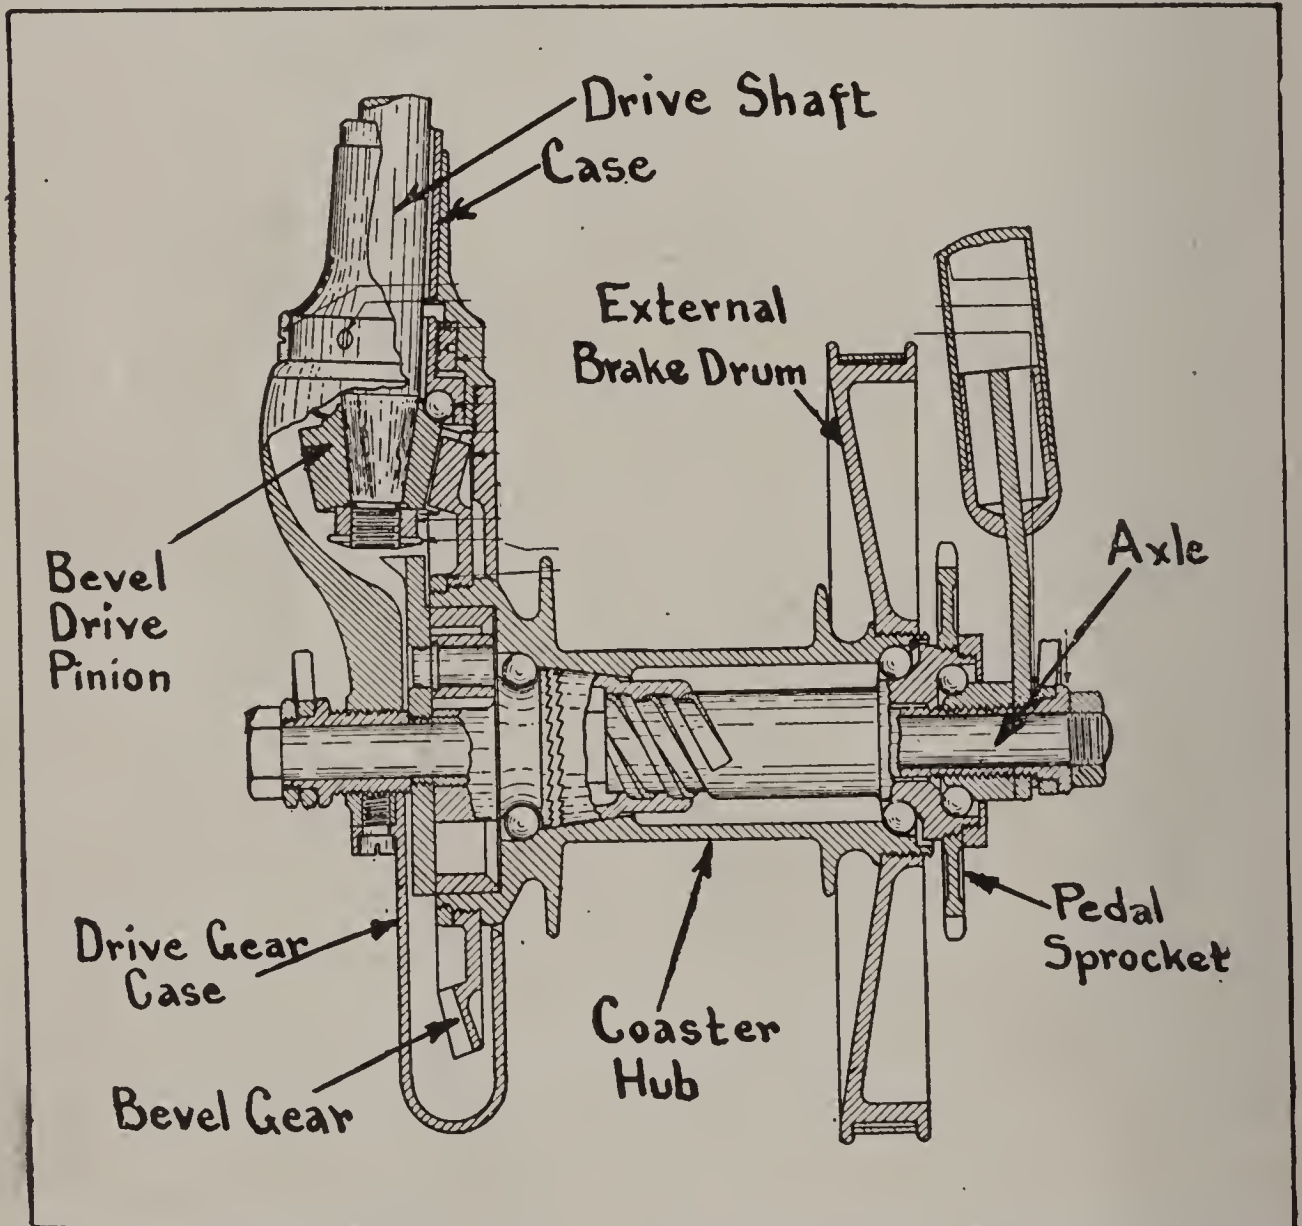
Bevel Gear Driving System of Pierce Four Cylinder Motorcycle.
